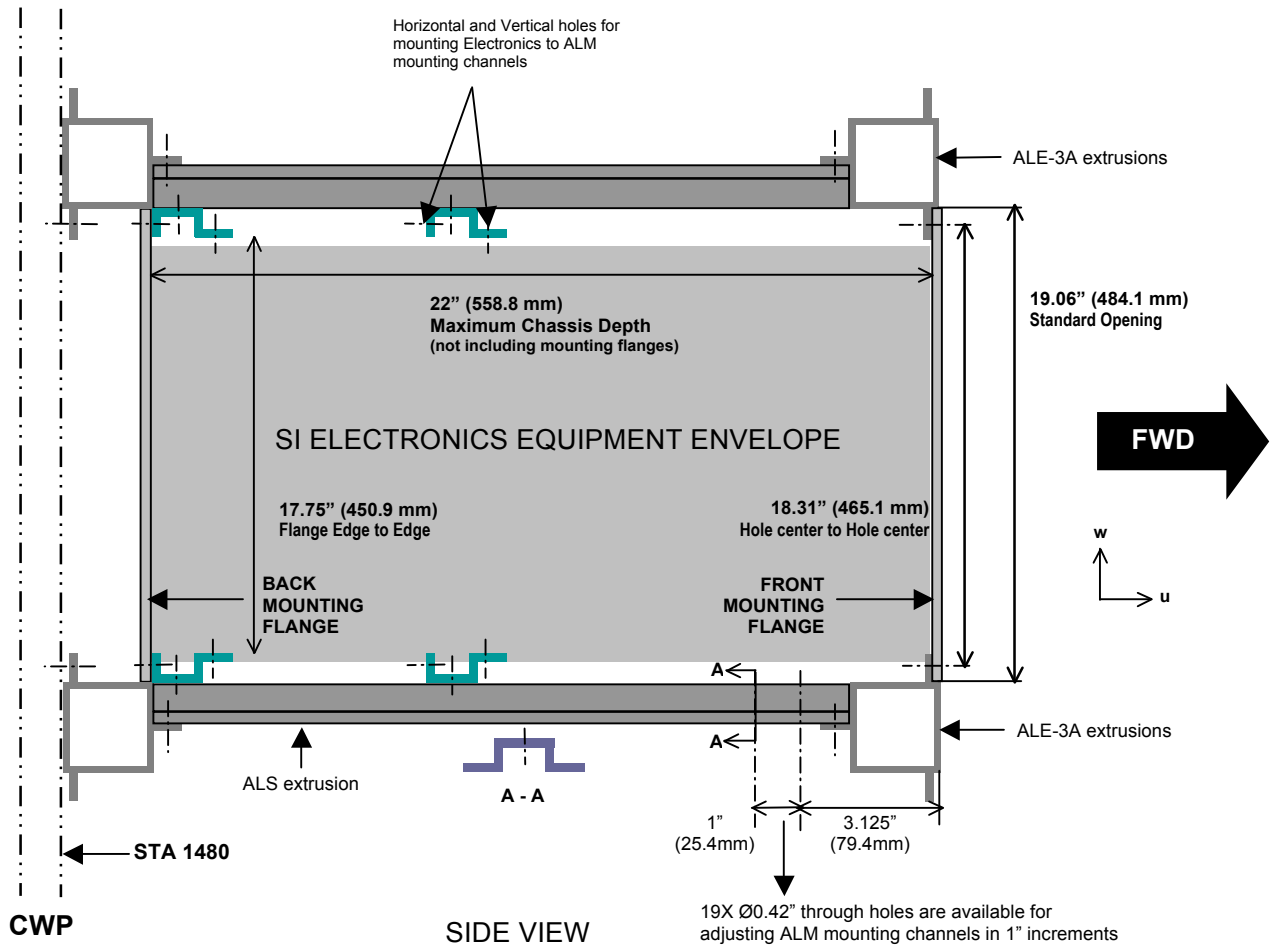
, Side View of SI Electronics Equipment Envelope
